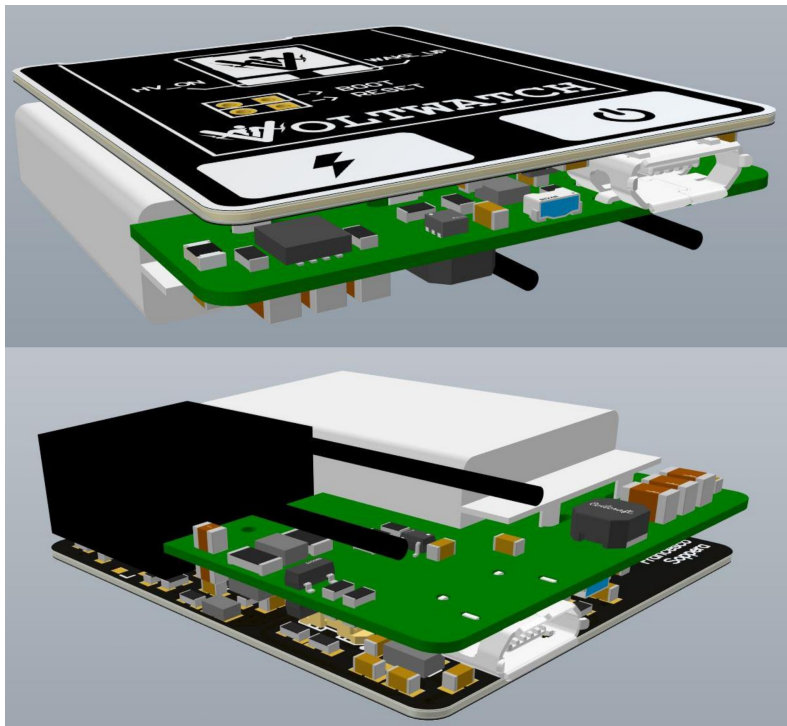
3D assembly of the PCB stack including the battery and the HV-transformer
